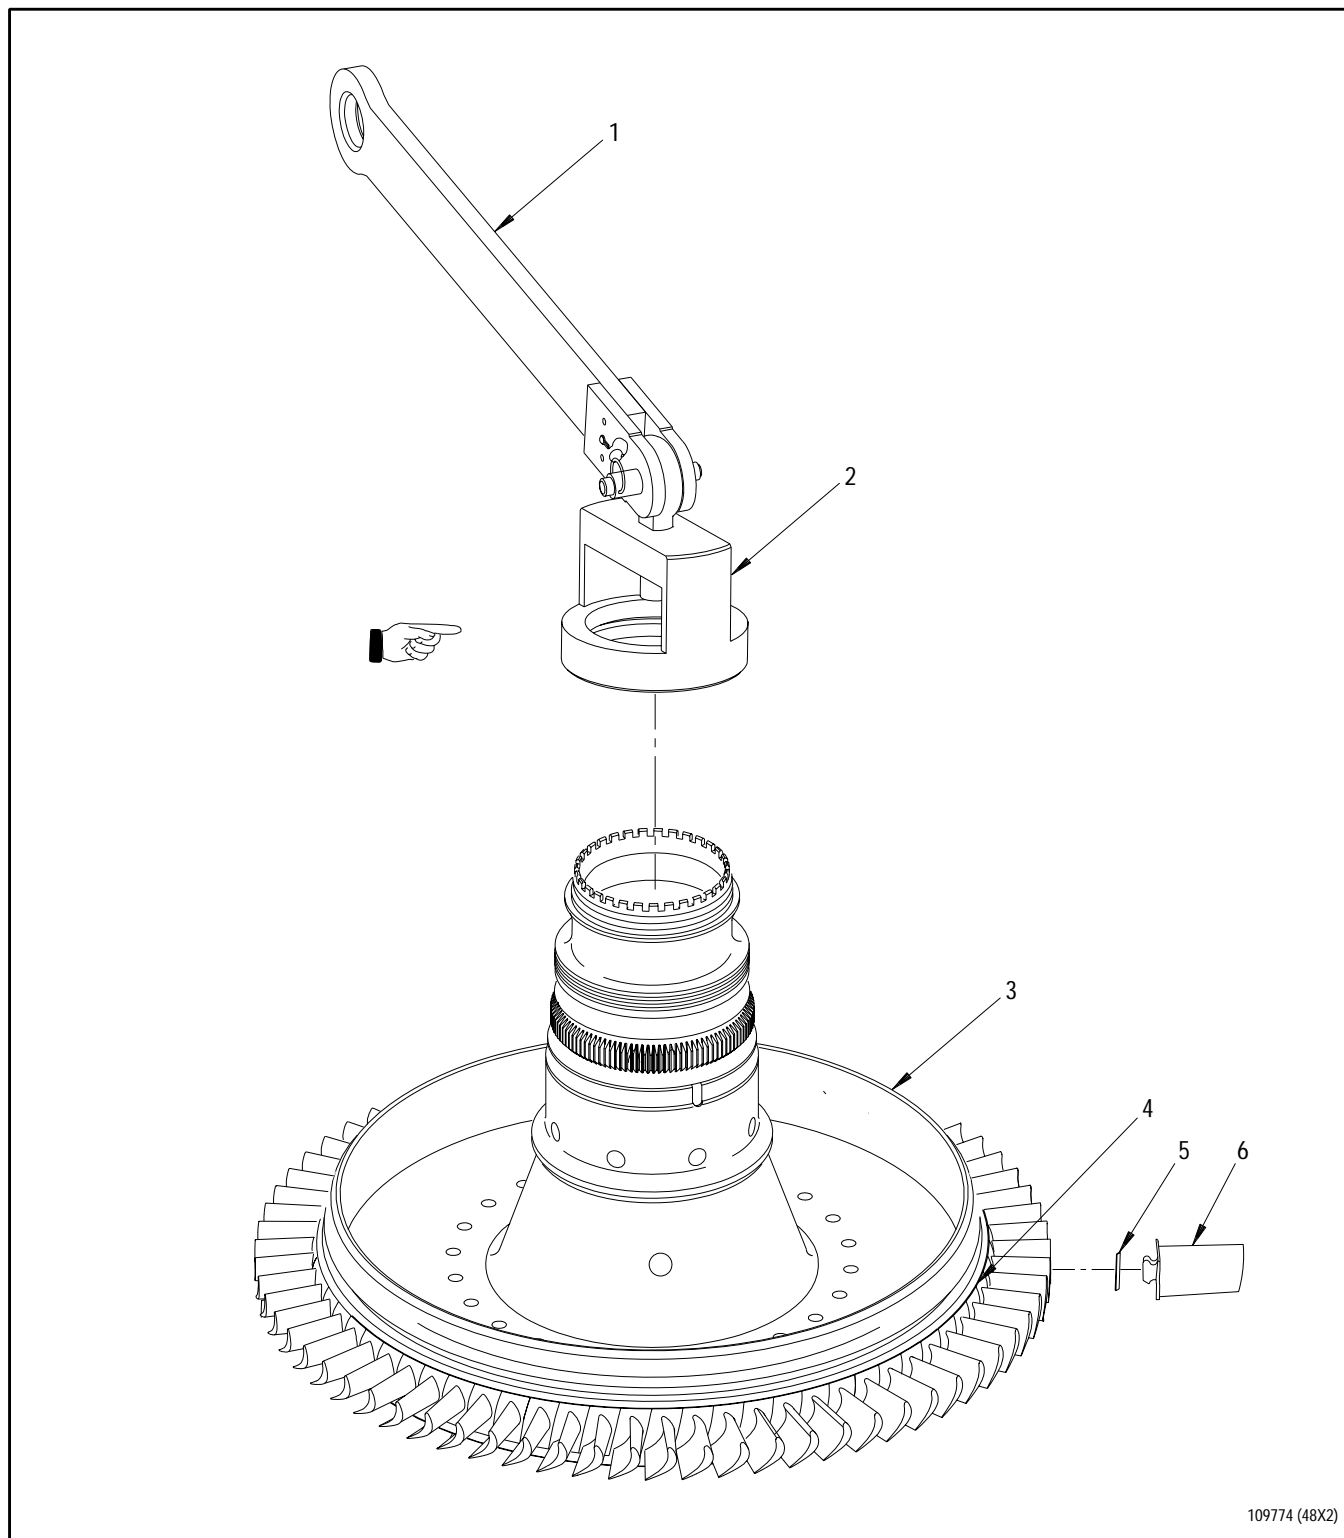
Sixth Stage Disk and Hub - Removal and Disassembly
